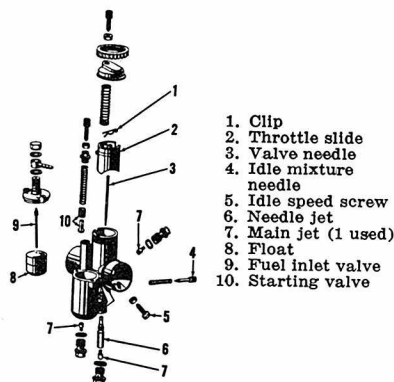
Exploded view of typical Bing carburetor used on some models. Main jet (7) is shown at three different possible locations.
